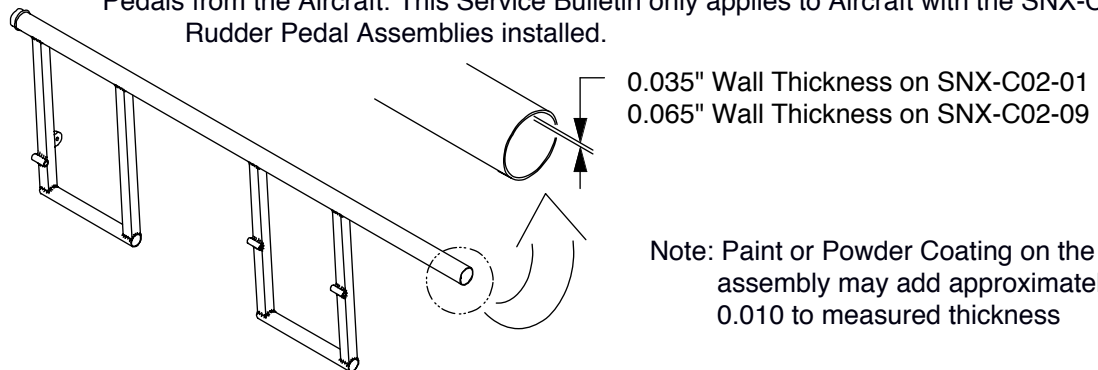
Figure A Identification of SNX-C02-01 Rudder Pedal Assemblies
